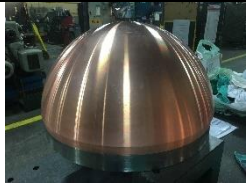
Copper Coated Closure Weld Zones on Alternate Assembly Method UFC.
